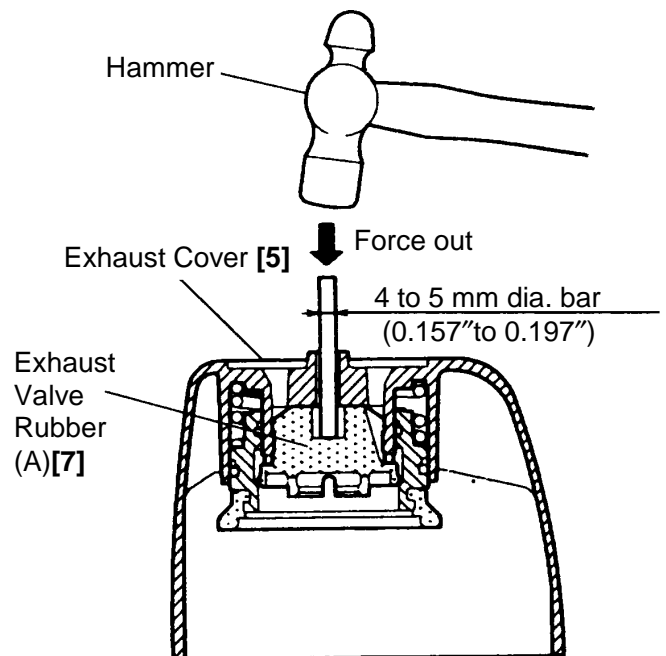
A Disassembly and reassembly of the exhaust cover, head valve, exhaust valve rubber (A), etc.
